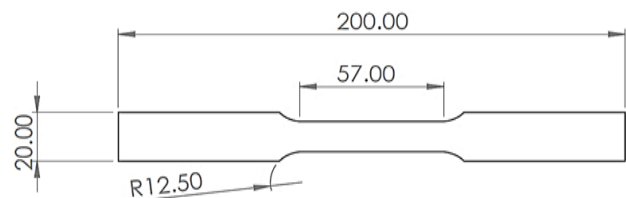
The general shape and dimensions of tensile specimens E8 for 3 samples of shank
